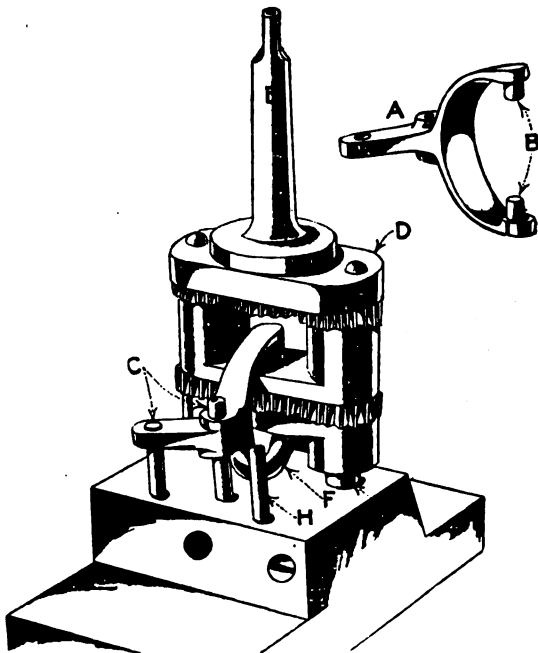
DETAILS OF DRILLING JIGS USED IN MACHINING PRINTING-PRESS FEEDER PARTS
